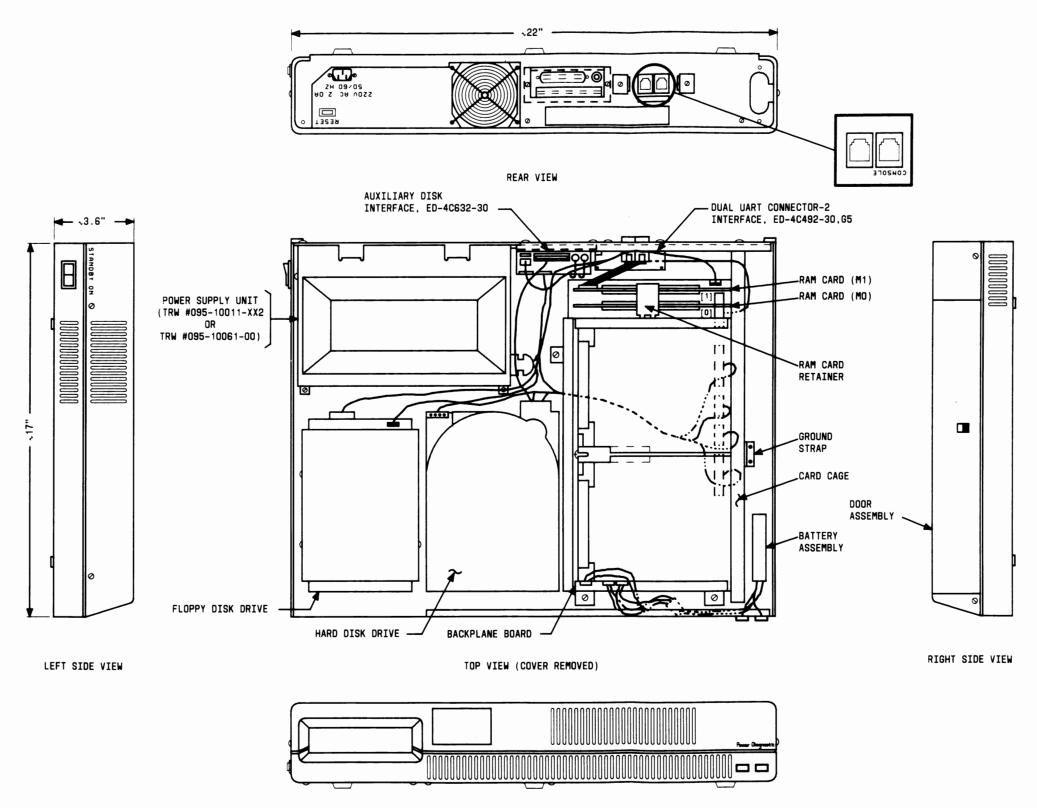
International 3B2/300 Computer Cabinet Assembly Drawing (ED-4C560-30)
